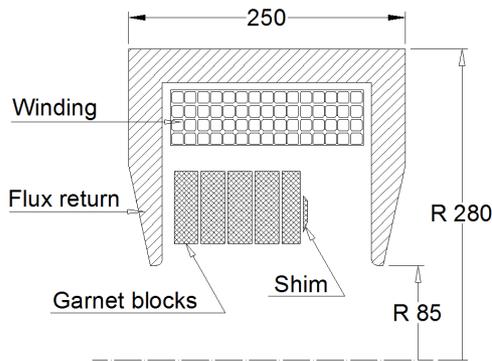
Position of the shim in the cavity. All dimensions in mm.
